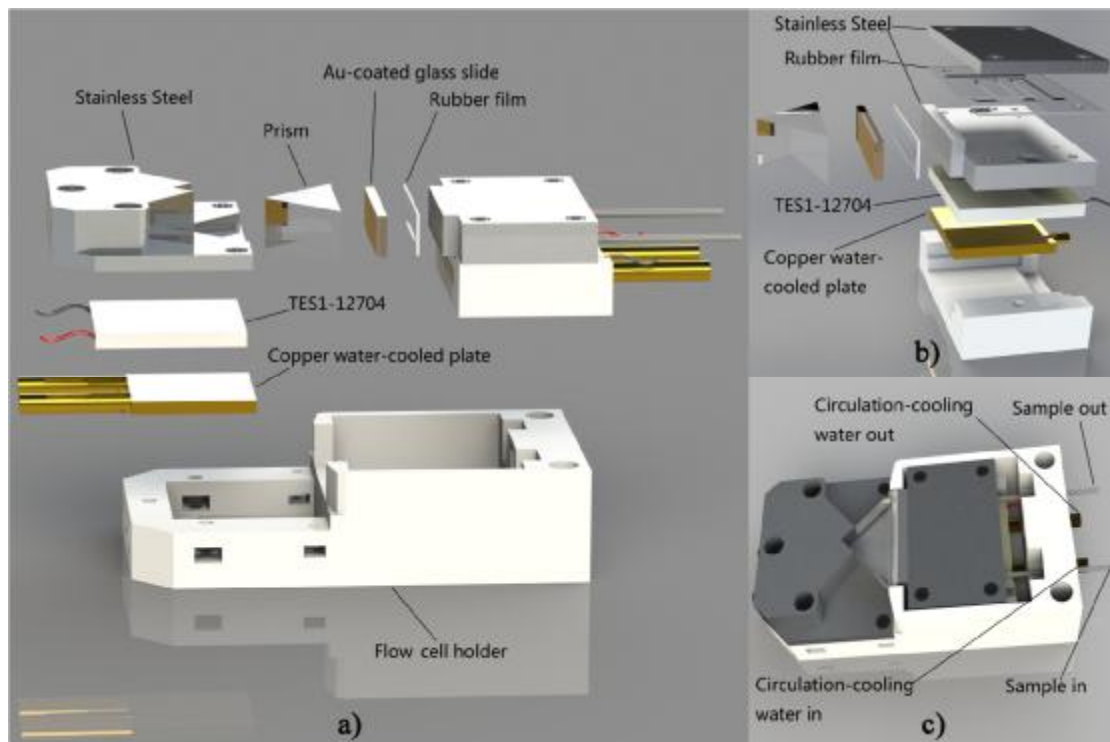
Flow cell module design. a) Exploded view for flow cell module. b) Exploded view for core part of flow cell module. c) Assembly result.
